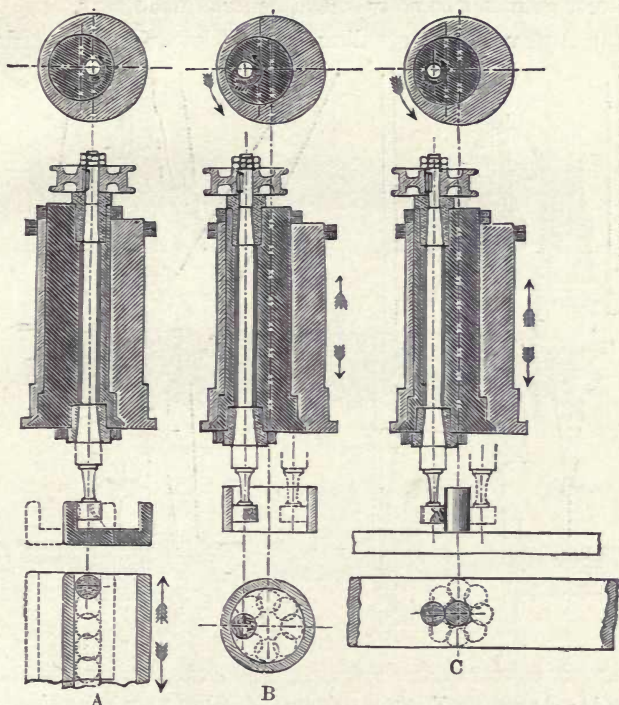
Sketch of Patent Triple Planet Spindle, Showing Arrangement and Method of Working.
